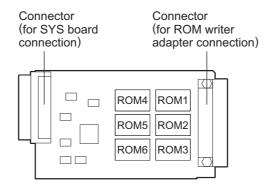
Jig board: PWA-DWNLD-350-JIG2 (48 MB)
